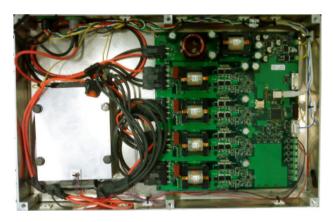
Assembly of the BMU, DUT and connecting cables in an aluminum casing
